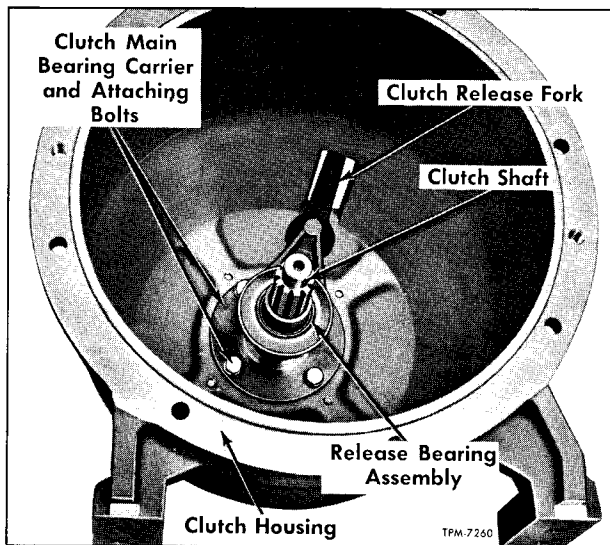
Clutch Fork and Drive Shaft Installed in Clutch Housing
